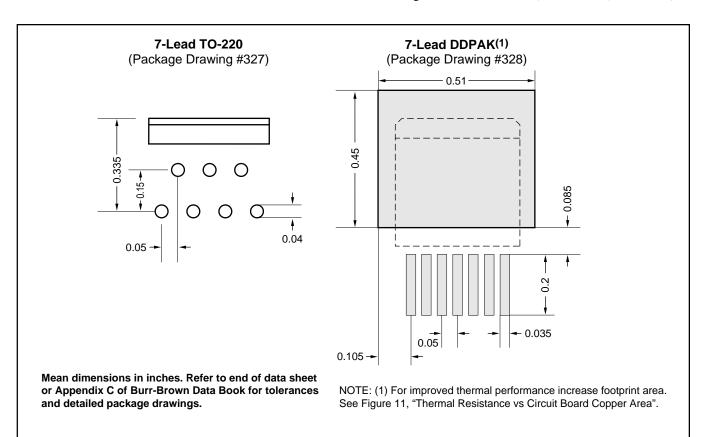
TO-220 and DDPAK Solder Footprints.
